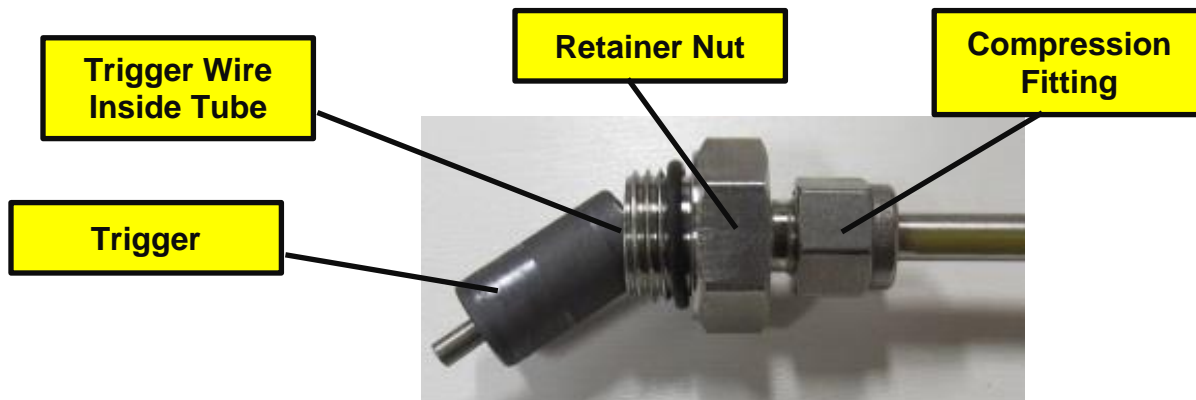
The trigger assembly. DO NOT allow the internal trigger wire to twist or kink since this will ruin the trigger assembly, and the entire PRD will have to be replaced.
